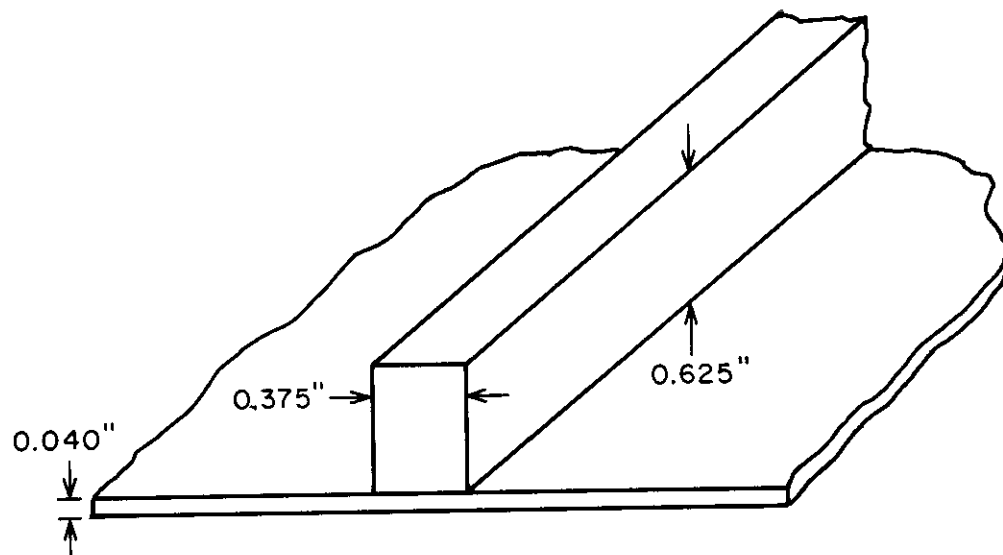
BEAM AND PANEL DIMENSIONS
